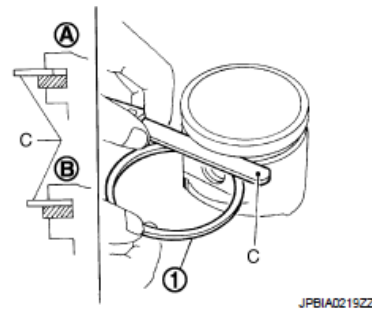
Measuring Side Clearance Of Piston Ring And Piston Ring Groove
